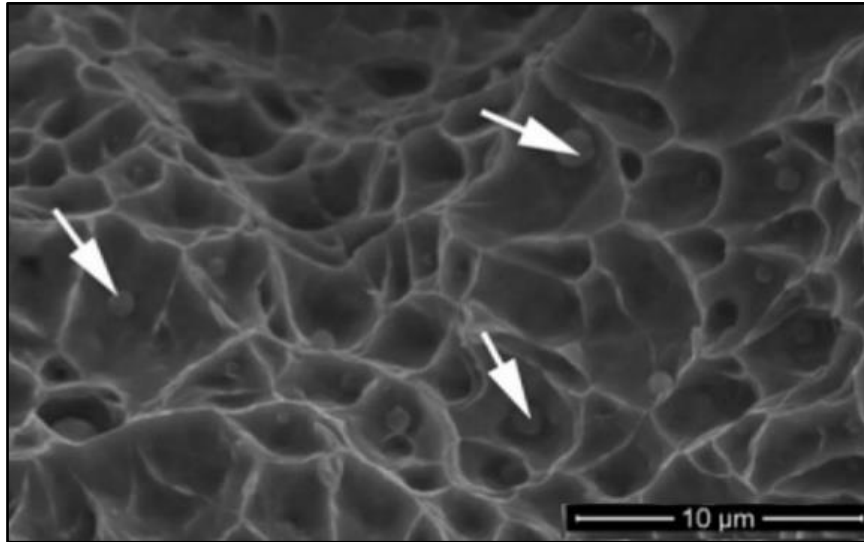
Dimple fracture in an AF weld metal (Lan et al., 2016).
